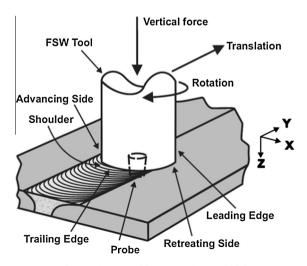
Schematic of friction stir butt weld [3].
